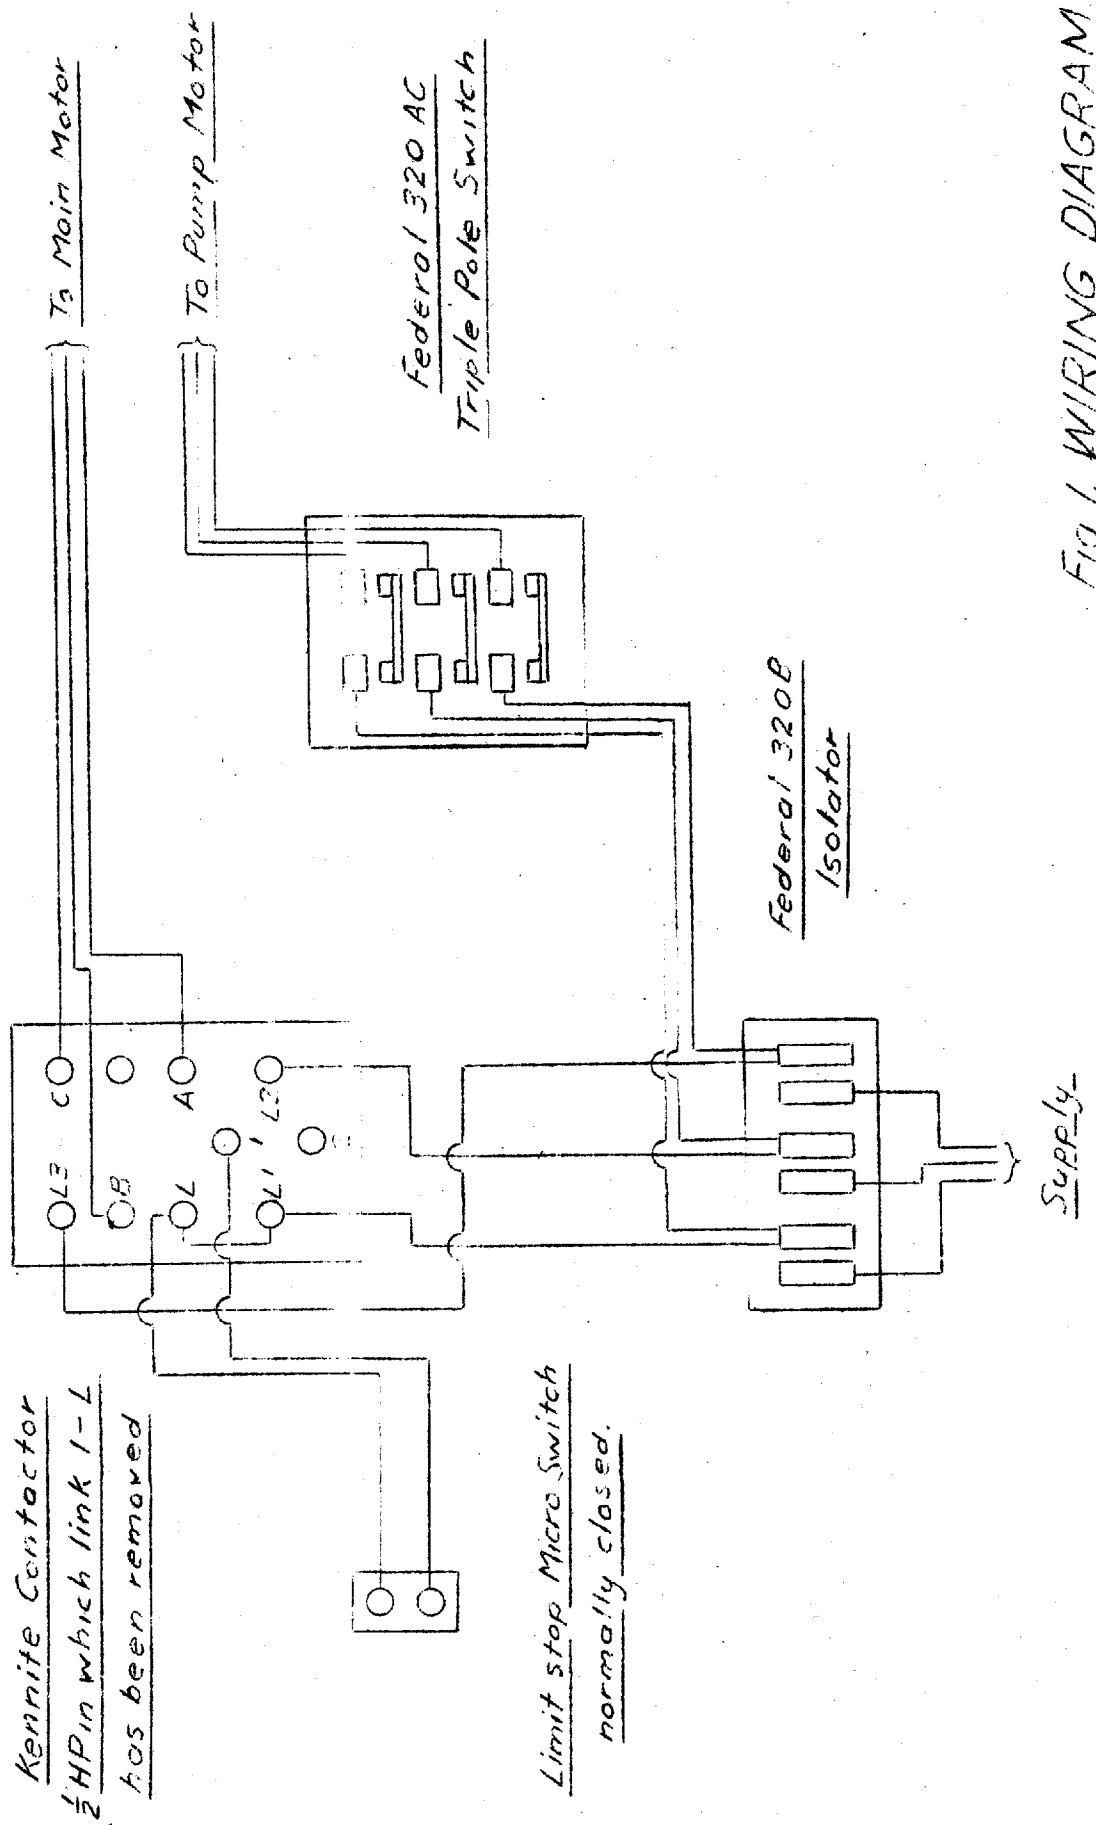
shows the wiring diagram for the machine. It is only necessary to bring the supply to the isolator switch making certain that the hob runs in a clockwise direction.
